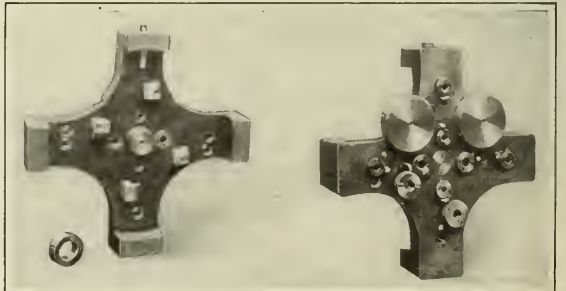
Example of Multiple-purpose Drill Jig used in performing Four Operations
